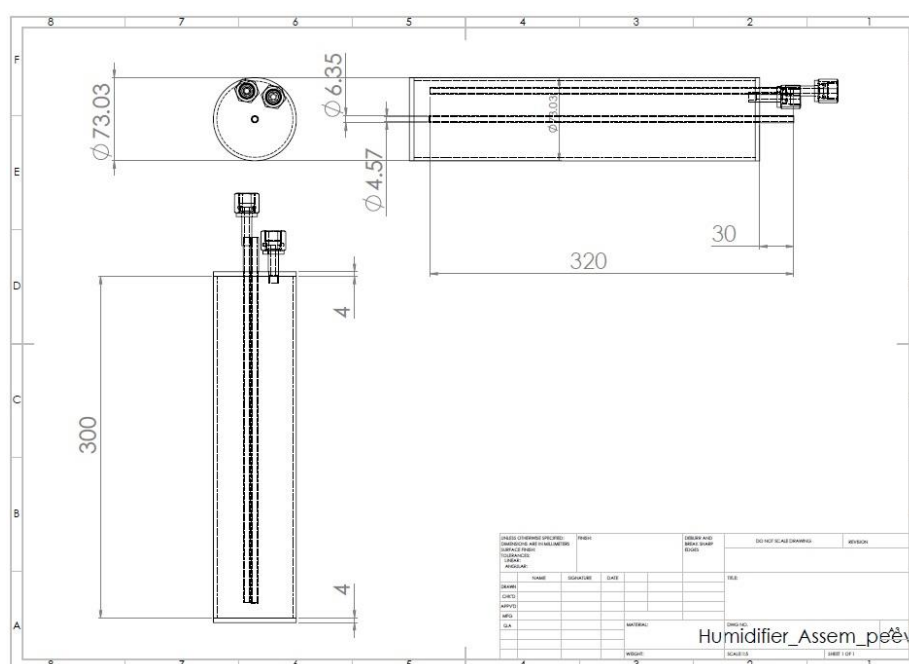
Heated humidifier plan elevation and end view with dimensions in millimetres.
